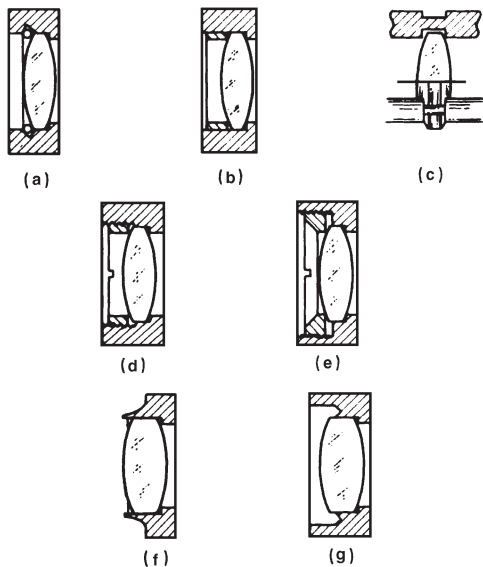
Several methods of retaining optical elements. (a) Wire spring ring in a V-groove; (b) flat spring ring; (c) three grooved rods at 120° ; (d) and (e) threaded lock ring; (f) spinning shoulder, before burnishing and (dotted) after; (g) cemented in place with trough for cement overflow.
